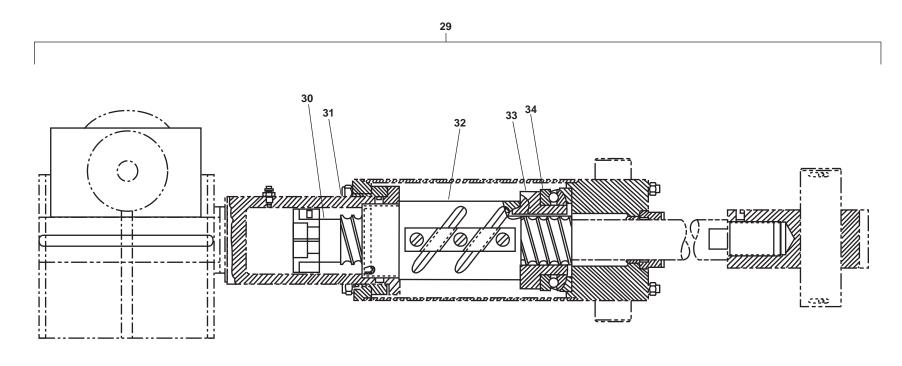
Towing Machine, Double Drum (Sheet 7 of 11)
